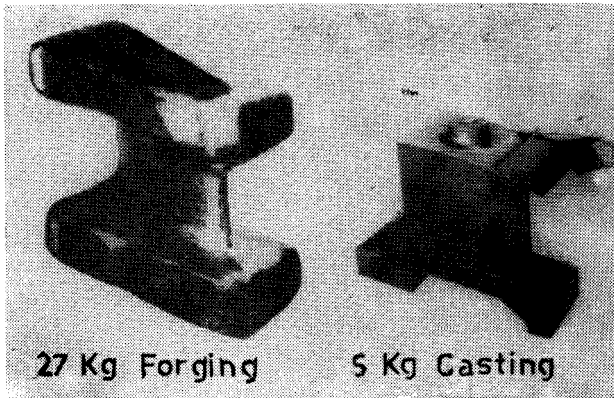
Relative amounts of titanium required for making an aircraft component by forging and casting route, (Left-27 kg forging, right-5 kg casting).
